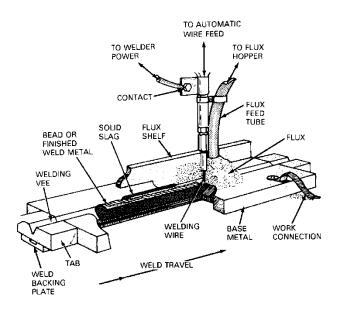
SUBMERGED ARC WELDING PROCESS
